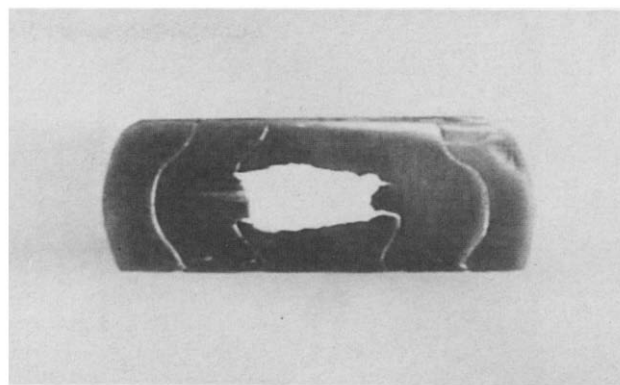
Cross-section photograph of the assembled Al_2O_3 specimen, metallic mold and external ring (inner to outer side).
